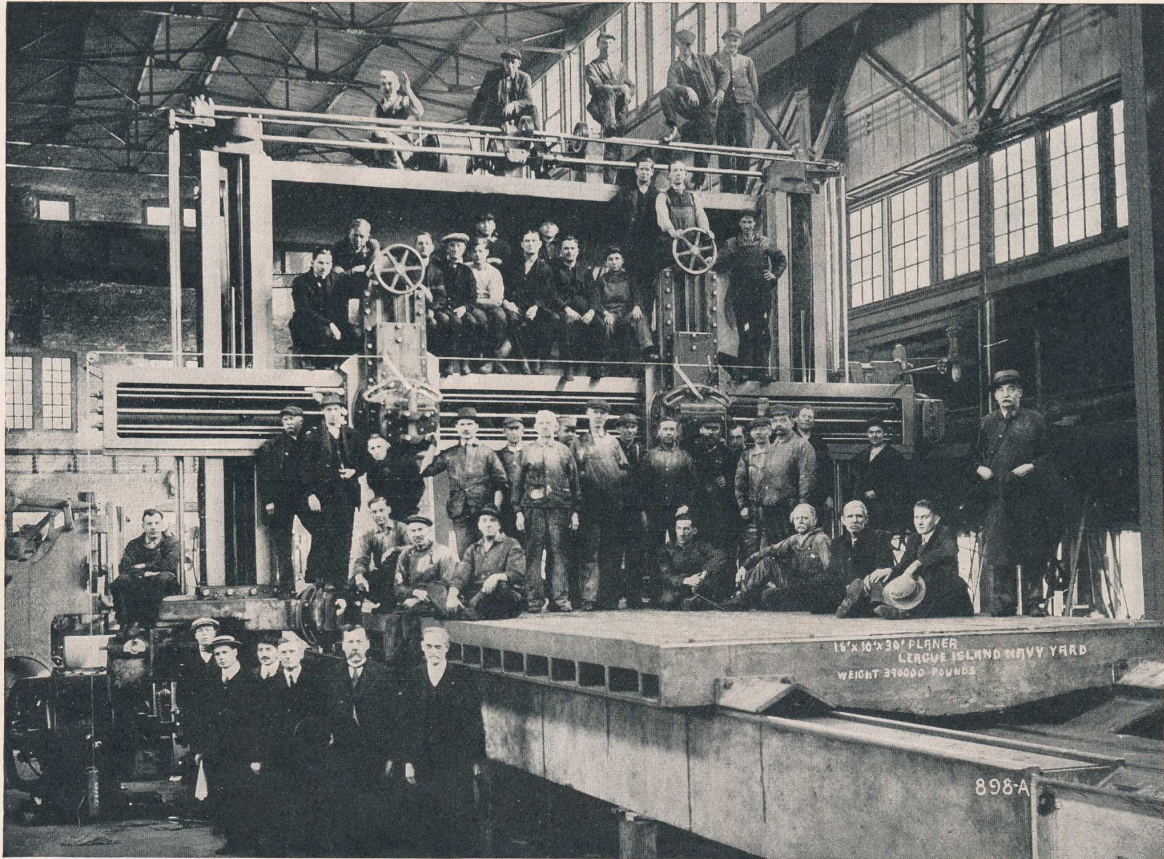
LARGE PLANING MACHINE UNDER CONSTRUCTION—ILLUSTRATING THE SIZE OF A STANDARD BETTS TOOL
